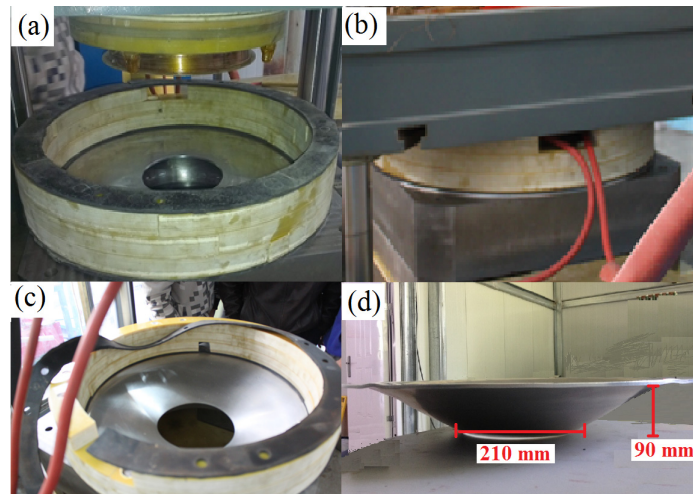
The experiment setup: (a) before the slide block was moved down; (b) the slide block was moved down; (c) after the discharge; (d) the formed workpiece [8].
